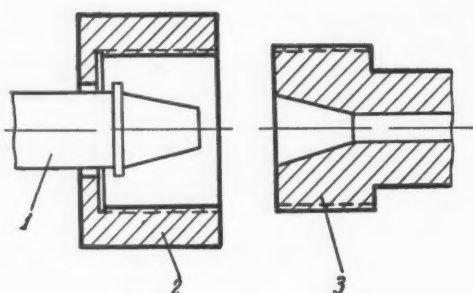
Disconnectable union: 1) Tube by which compressed air is supplied to the stopper rod; 2) coupling nut; 3) connecting piece with conical recess.
